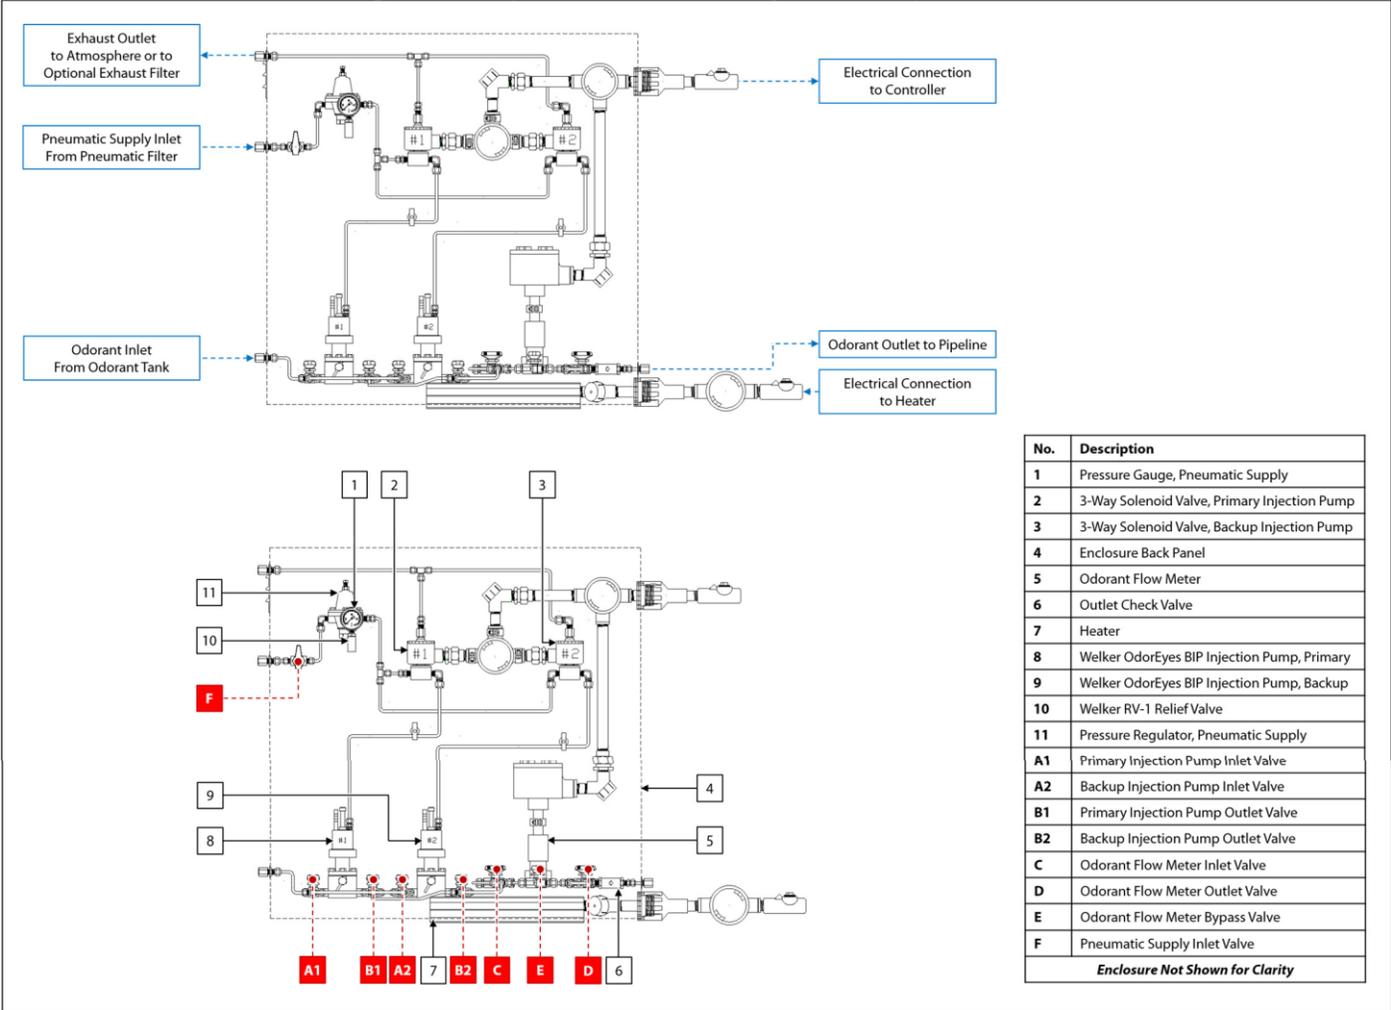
Pump Cabinet – Dual SSO-9 Injection Pumps With Blanket Pressure Regulator and Heater
